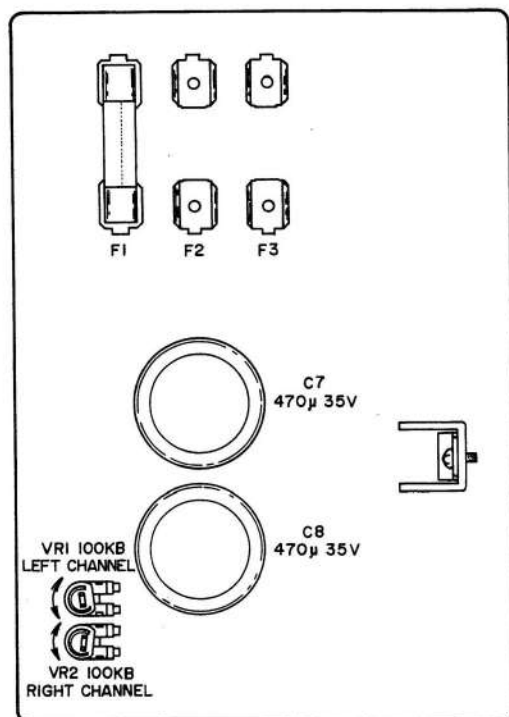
Power Sys. Con & OSC P.C Board (AC-3503) Adjustment
